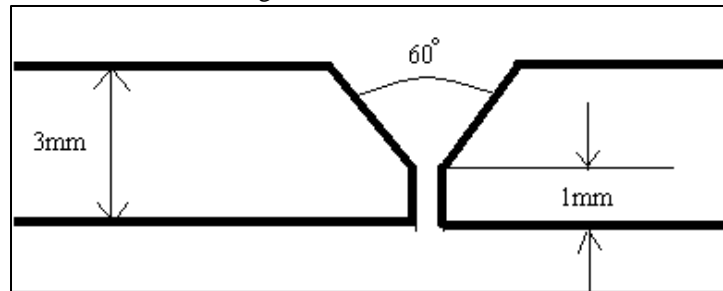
Edge Preparation of Weld Specimens [3].
